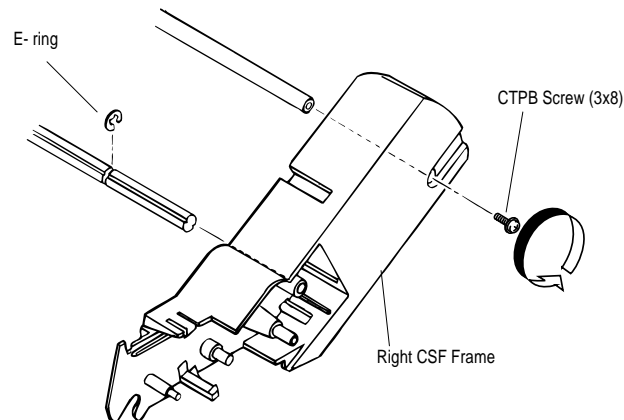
Removing 1 E-ring and 2 CTBS Screws
